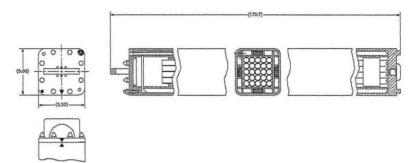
, PWR Insert and PWR 5X5 Rod Canister- Schematic
